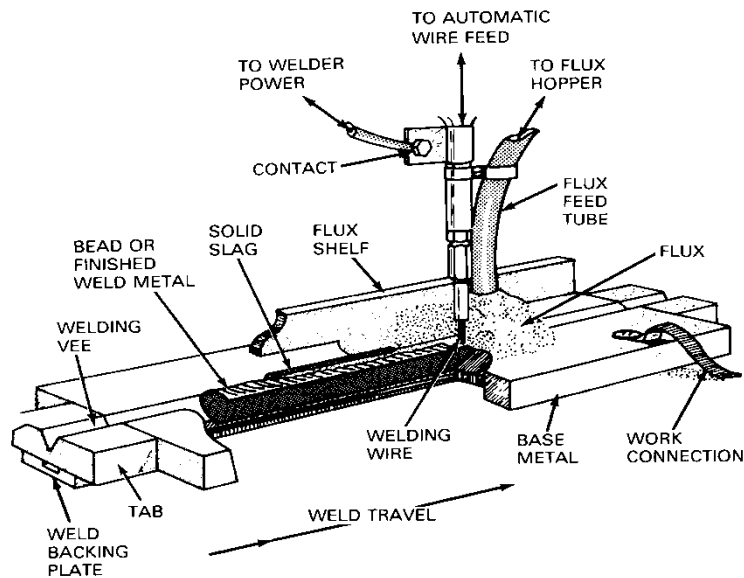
Mechanism of submerged arc welding [3]
